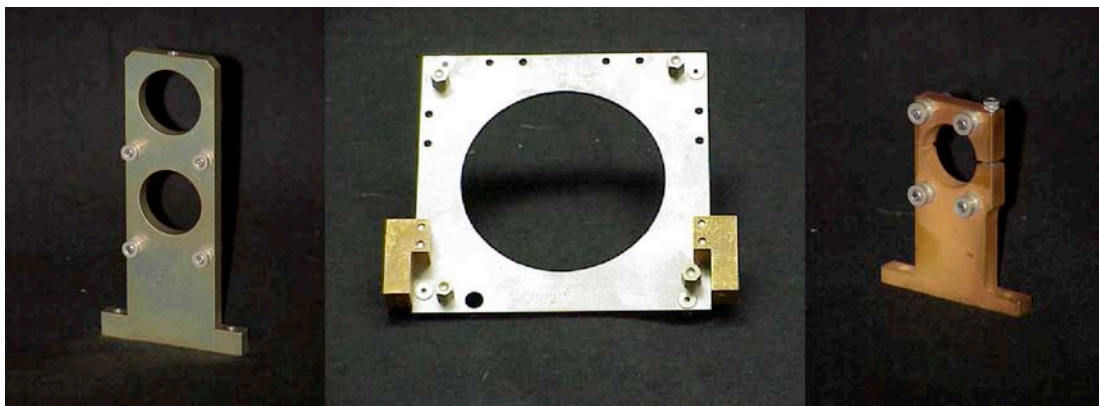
4 K aluminum post (left), 1 K molybdenum ring (center) and 0.1 K gold-plated copper post (right) of the tower assembly.
